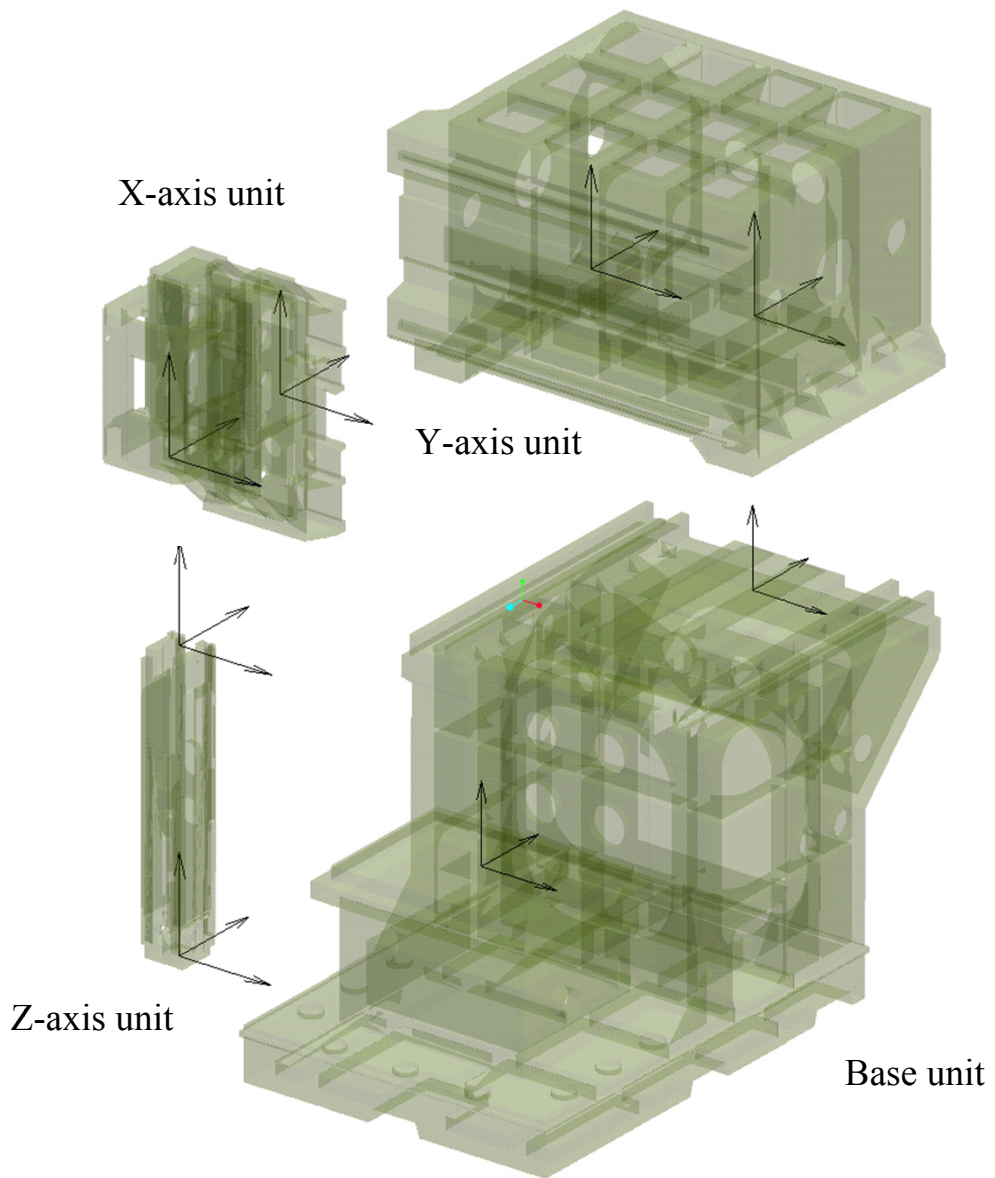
Disassembly of Sodick AQ55L EDM machine.
